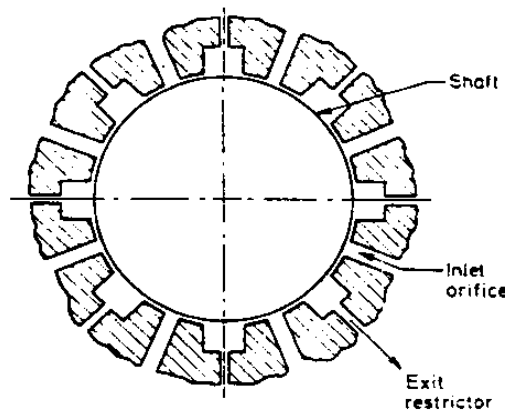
Arrangement of one type of externally pressurised gas bearing
